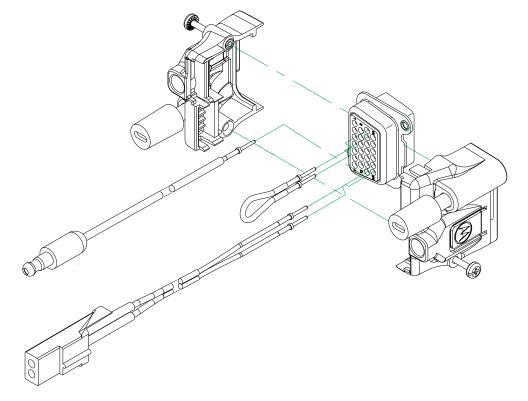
Exploded View of Accessory Connector Assembly (P2)
